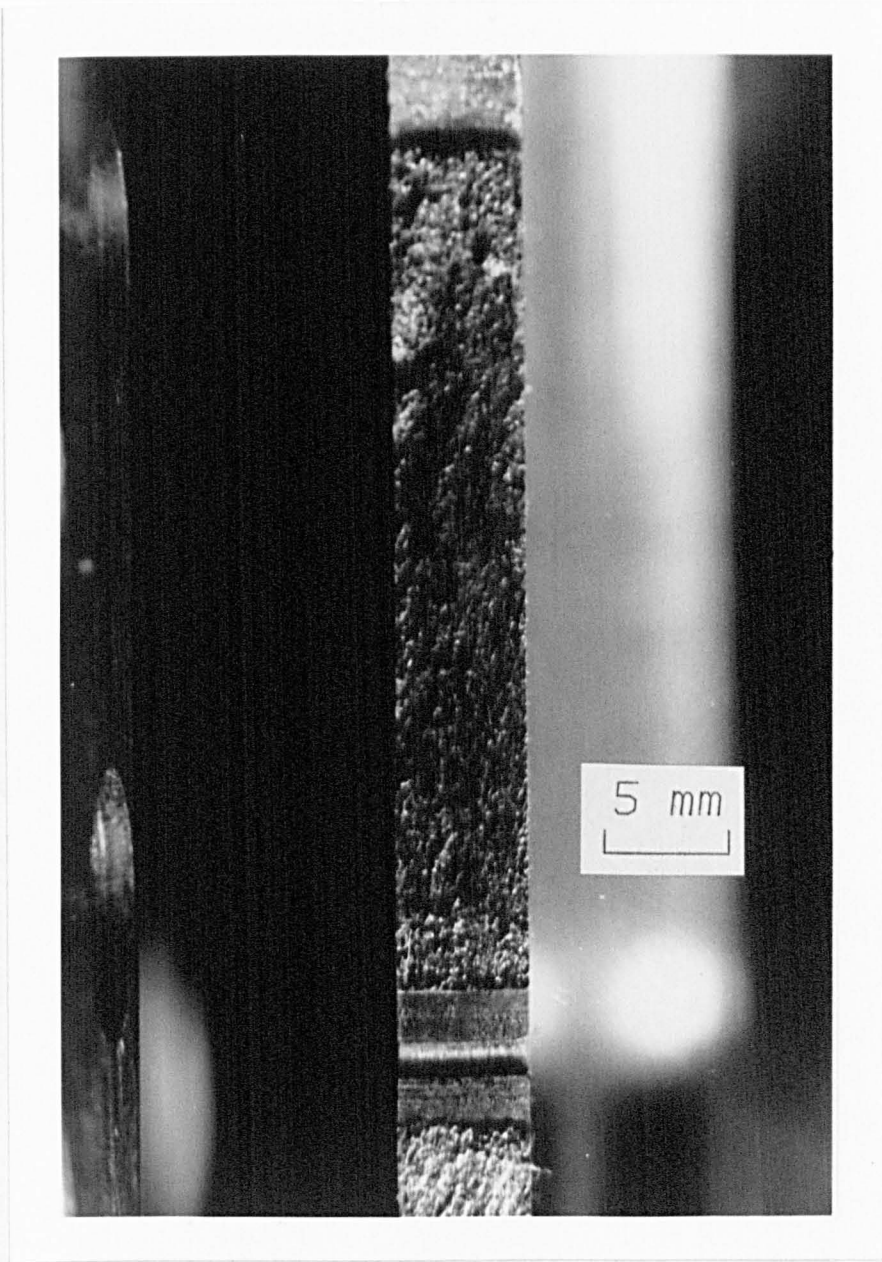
Smoothed fracture surface in RSB20.
